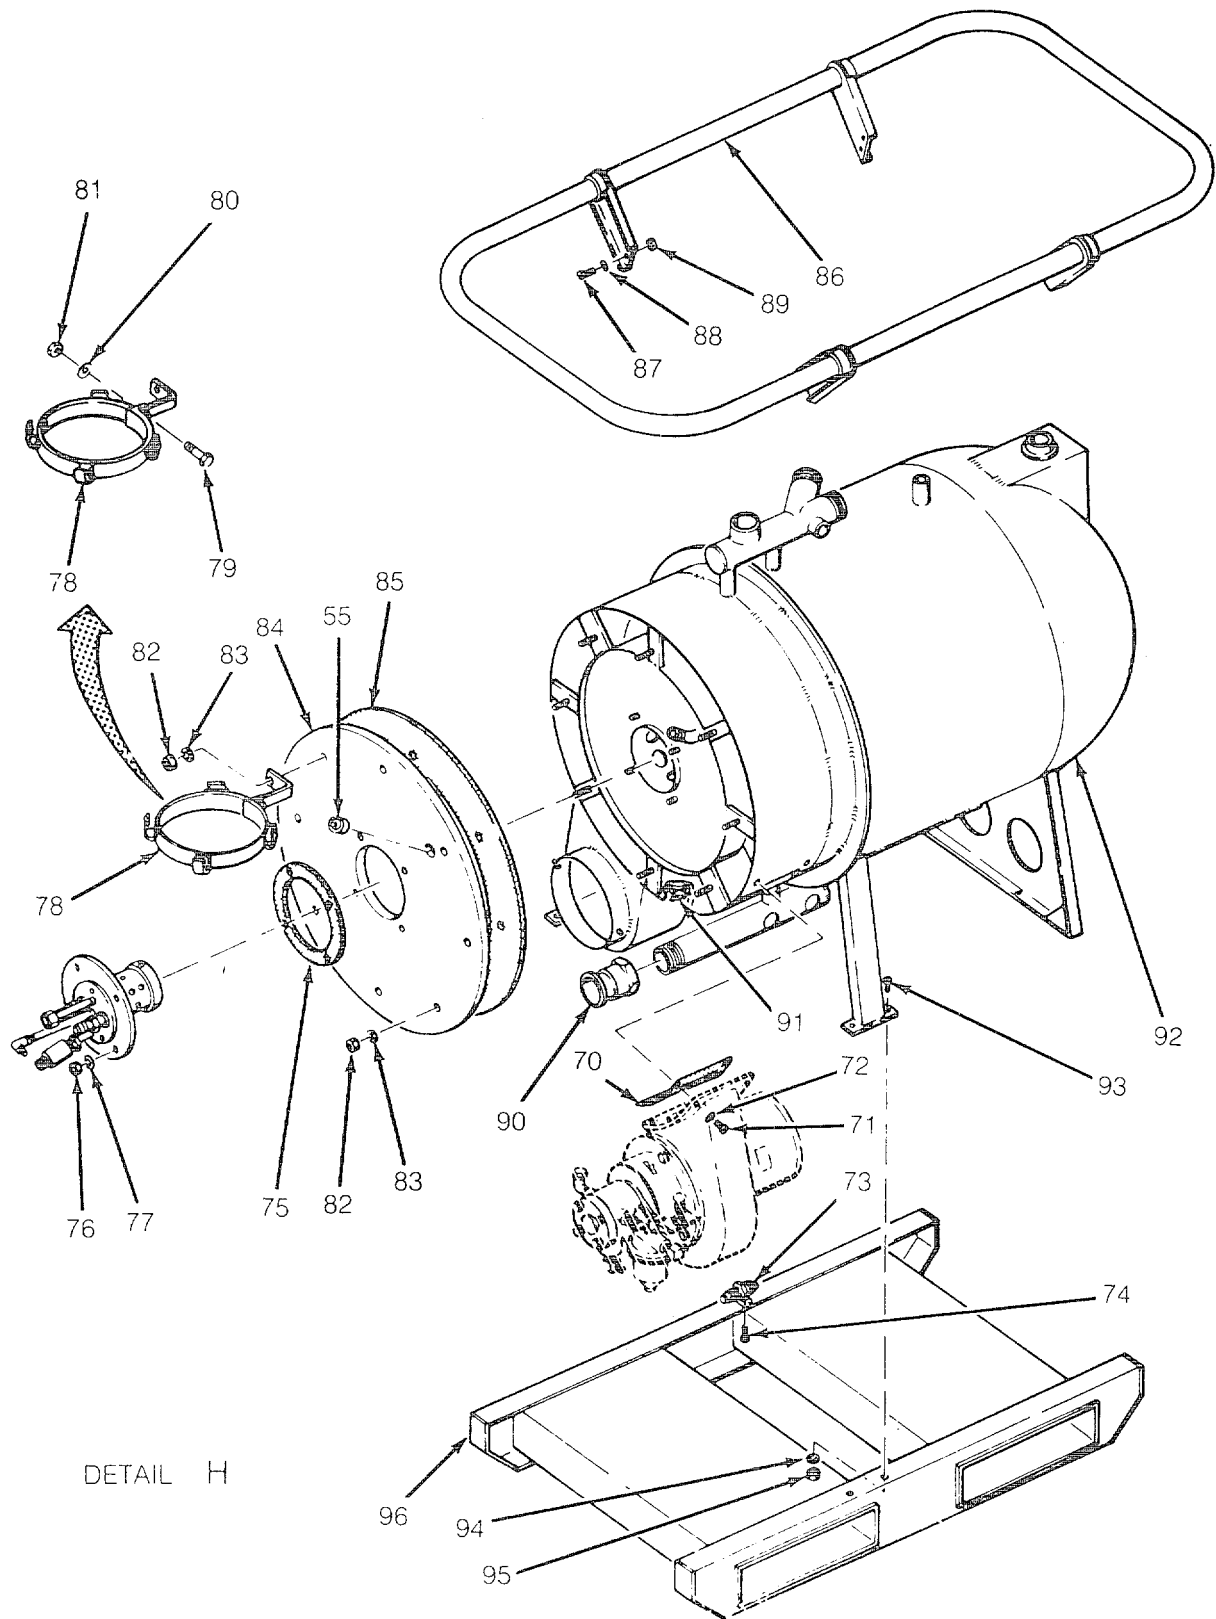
Water Heater Assembly (Sheet 4 of 4)
